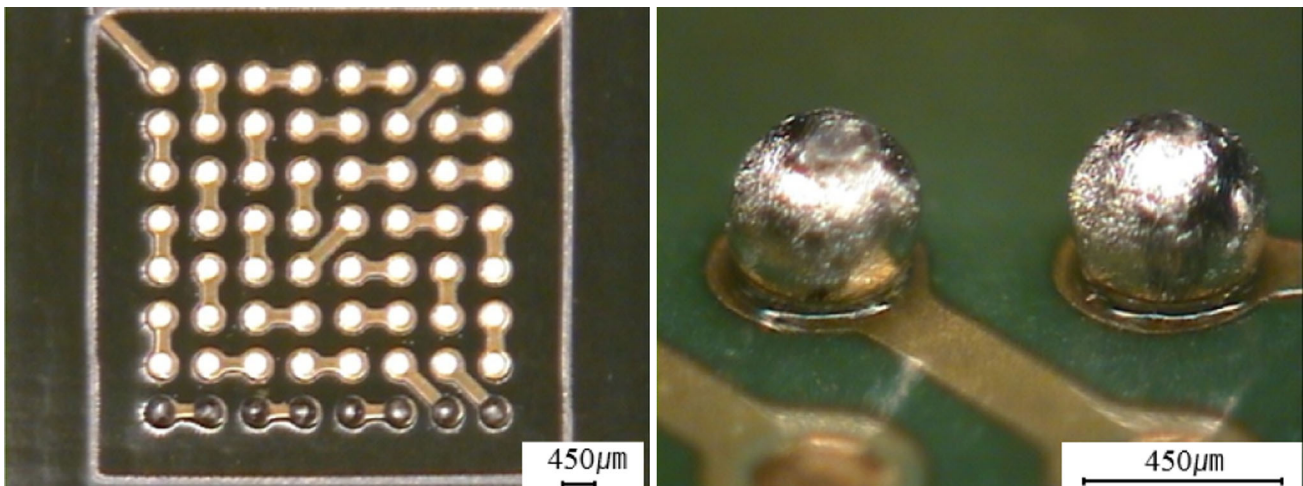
Optical micrographs of the Sn-Ag-Cu solder balls on the ENIG-finished test PCB.
